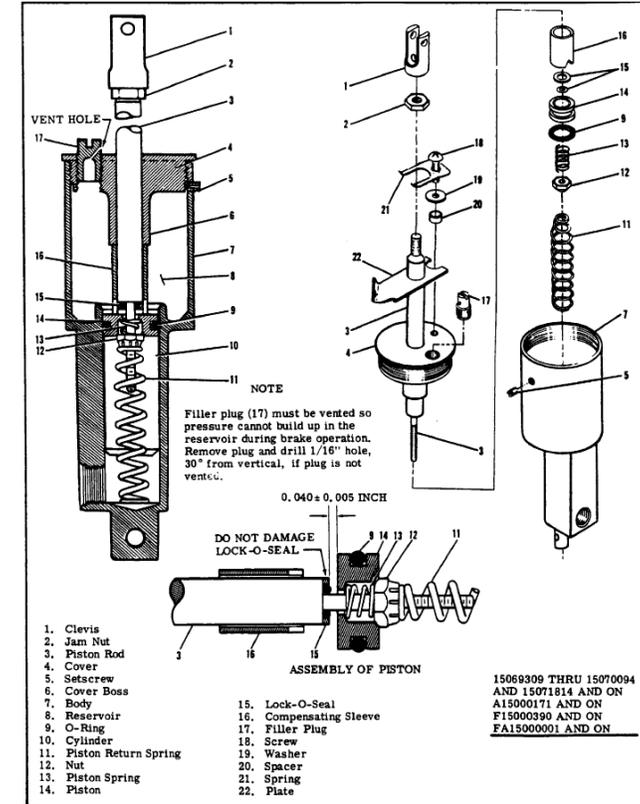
Brake Master Cylinder (Sheet 1 of 2)
